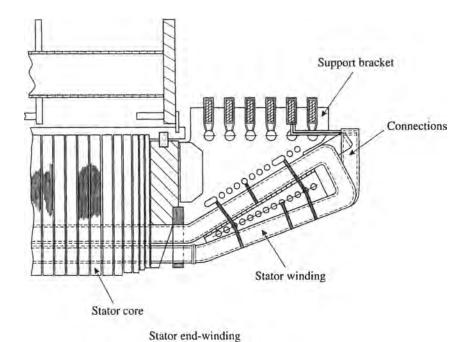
[S23] Schematic representation of a typical end-winding support assembly.
